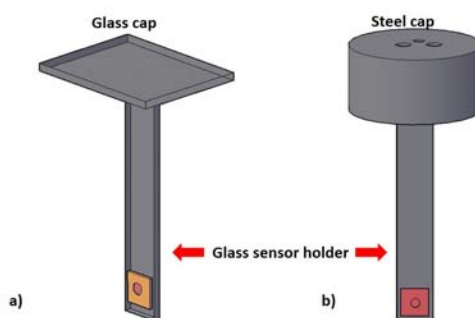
Sensor holder. a) Glass cap sensor holder. b) Steel cap sensor holder.
